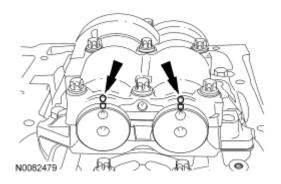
Locating Balancer Unit And Shafts Reference Mark
